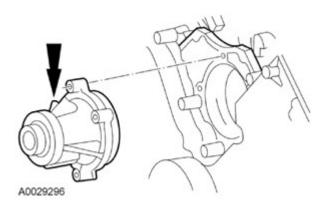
Locating Coolant Pump Courtesy of FORD MOTOR CO.
